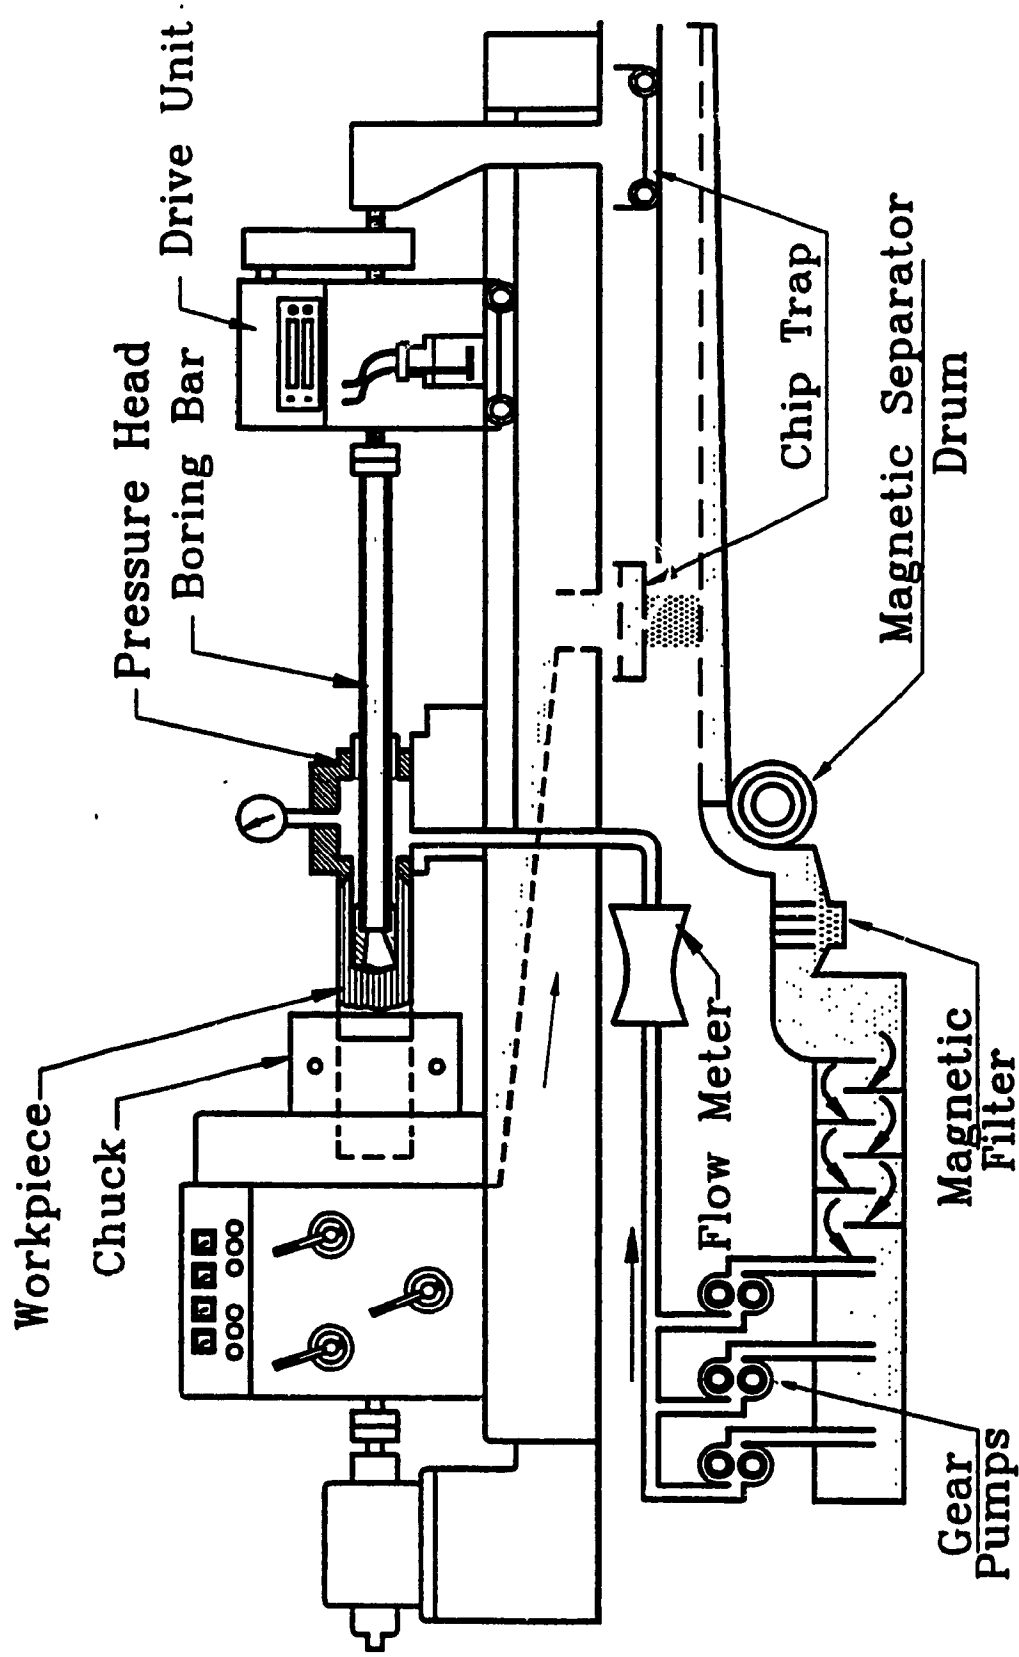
Schematic illustration of a deep hole drilling machine[58].
